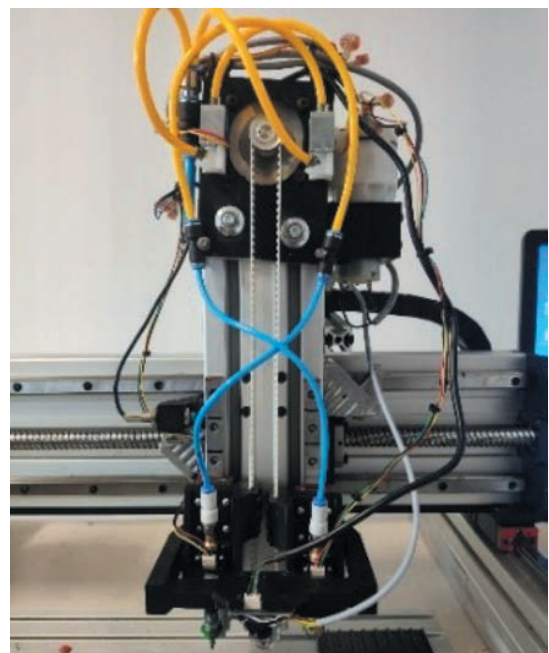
Final appearance of the drive system in the Z-axis direction including the lifting system
